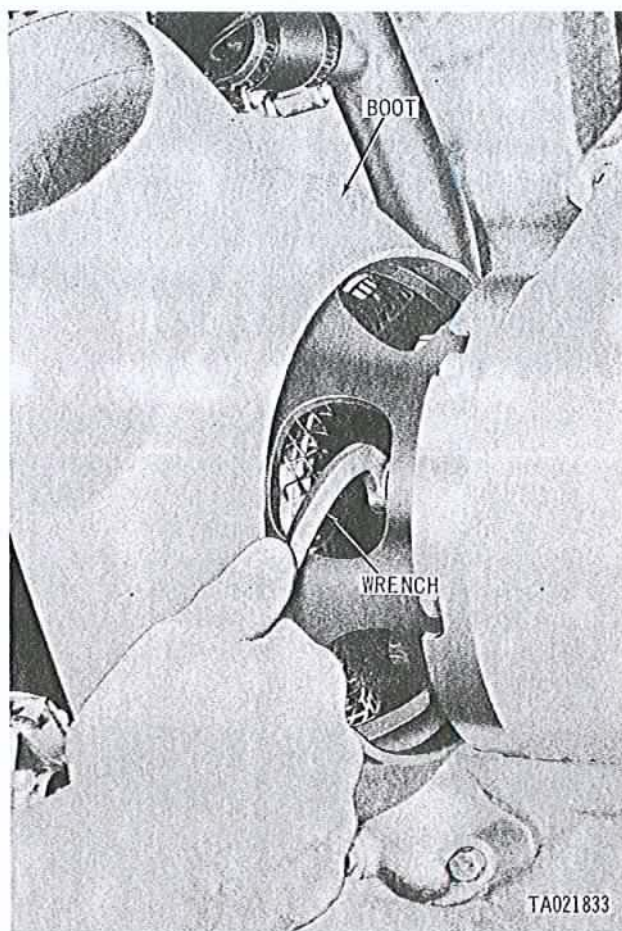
Loosening or tightening generator mounting nuts, model AVDS-1790-2D and AVDS-1790-2DR engines.
